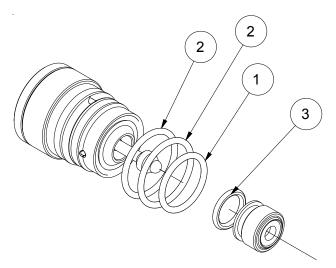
78949-00 Valve & 77367-00 Seat Replacement Parts
